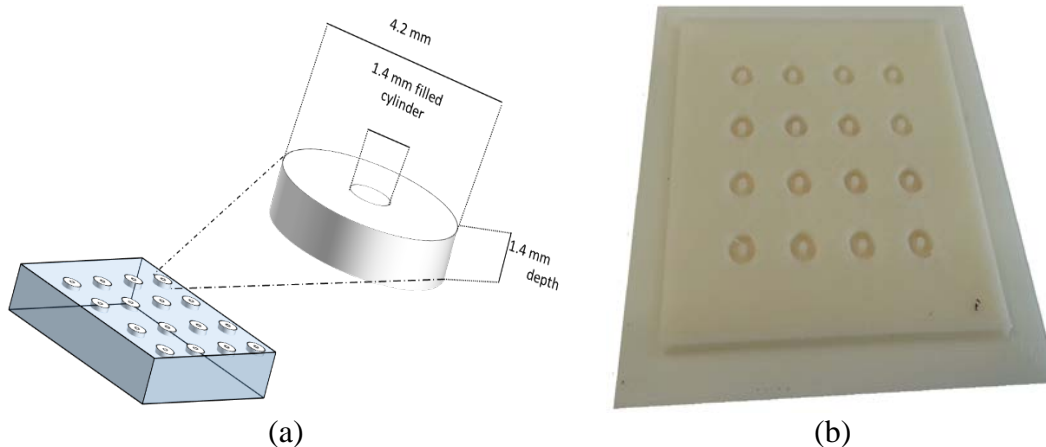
Mould for mouse-sized rings manufacturing (a) the initial design (b) the final mould
